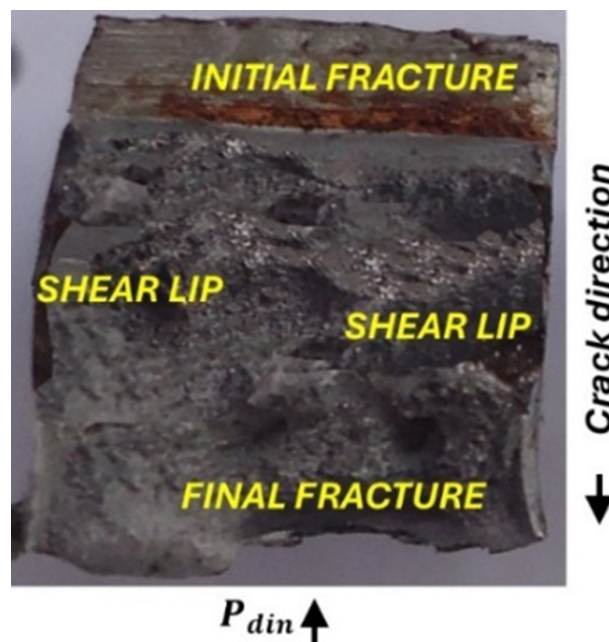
Fracture surface of the Charpy specimen indicating crack initiation, final fracture, and shear lips, together with crack and load directions
